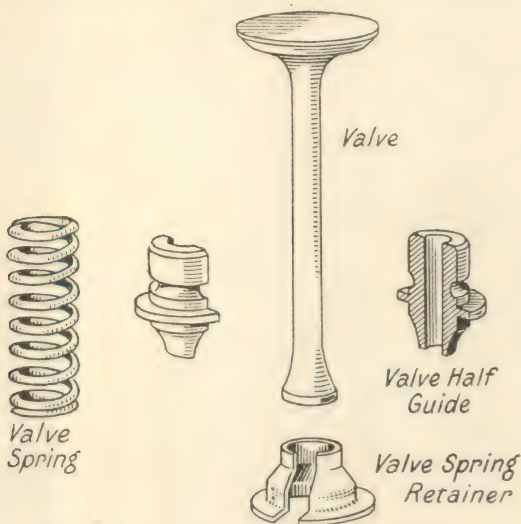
THE FORD VALVE AND ITS COMPONENTS
